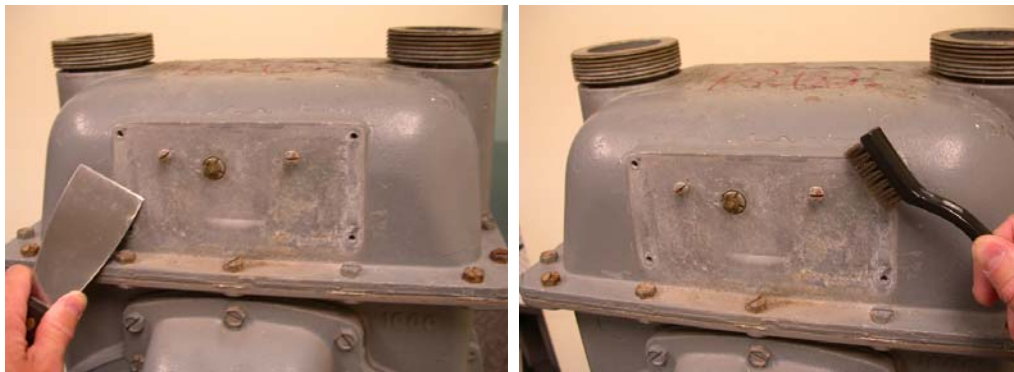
5. Removing Old Gasket Material with a Scraper and a Wire Brush
